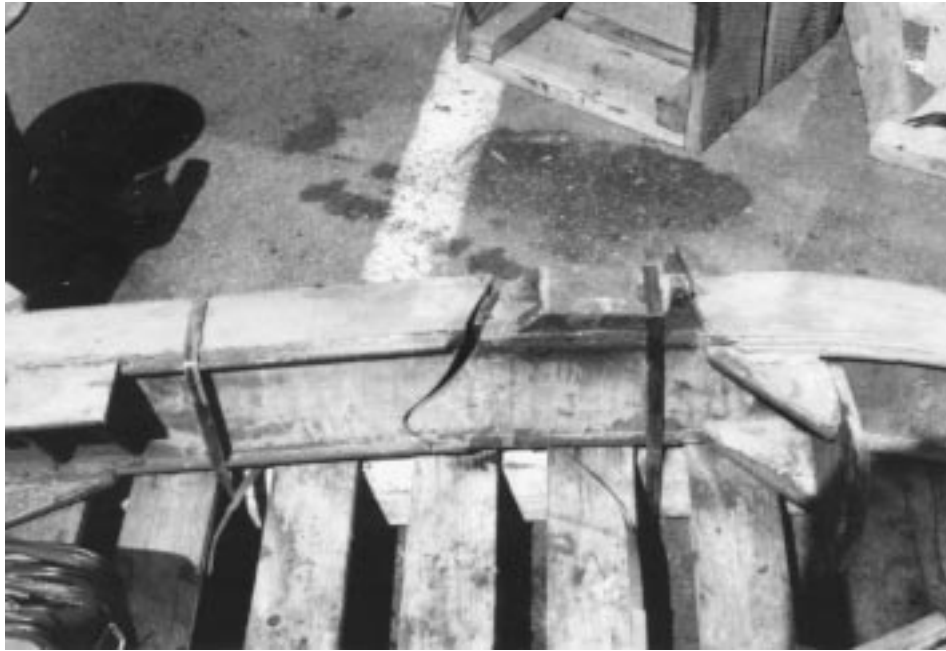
Fatigue cracking at welded detail in vehicle frame.
